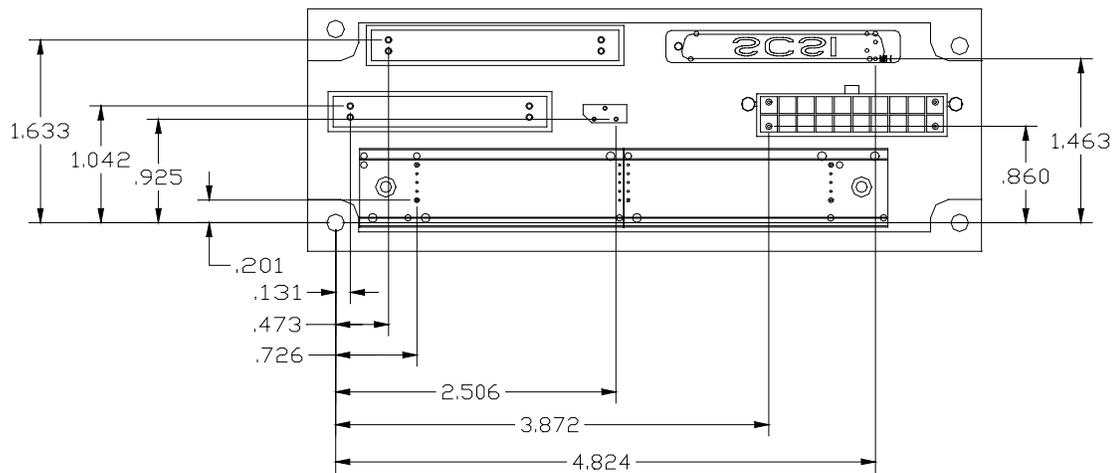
Peripheral Bay Board (Chassis Side) Connector Layout
